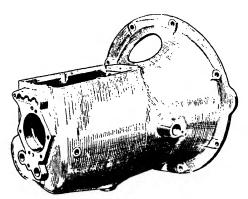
Combined Car Engine Crankcase and Clutch Housing in Aluminium Alloy
